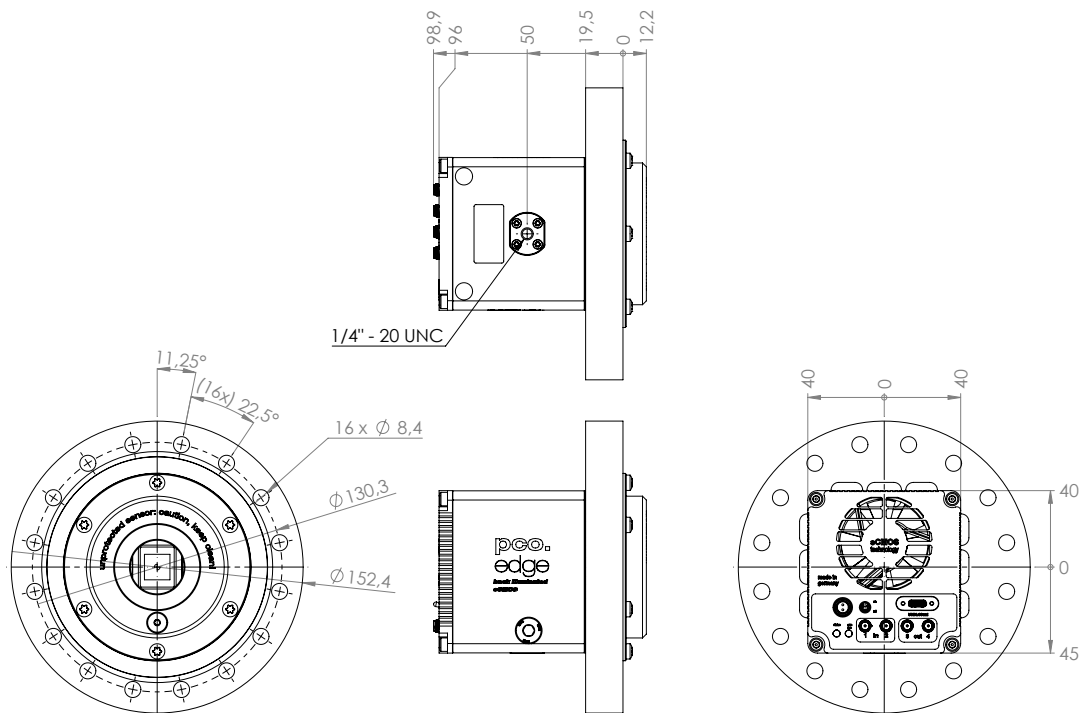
outlines pco.edge 4.2 bi XU (all dimensions given in mm).
